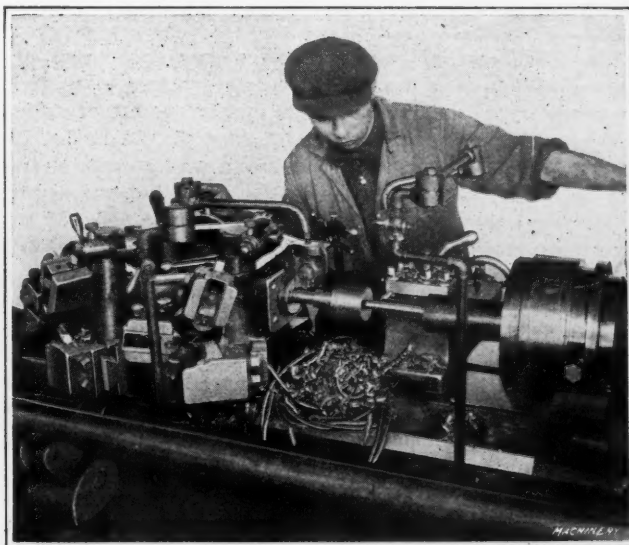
Machine taking Finishing Cut on Slender Portion of Work shown in Fig. 23
